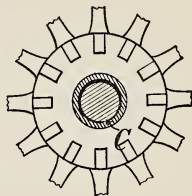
b*.—Section through a carriage hub, showing an ordinary bearing.
